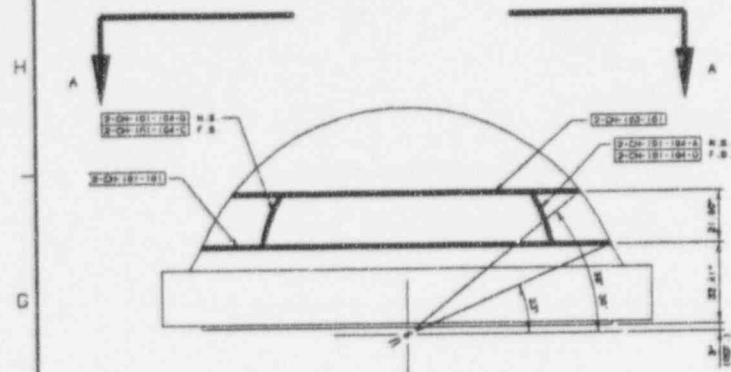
DETAIL OF SKIRT TO VESSEL WELD (2-TBB03-SKIRT-w)
